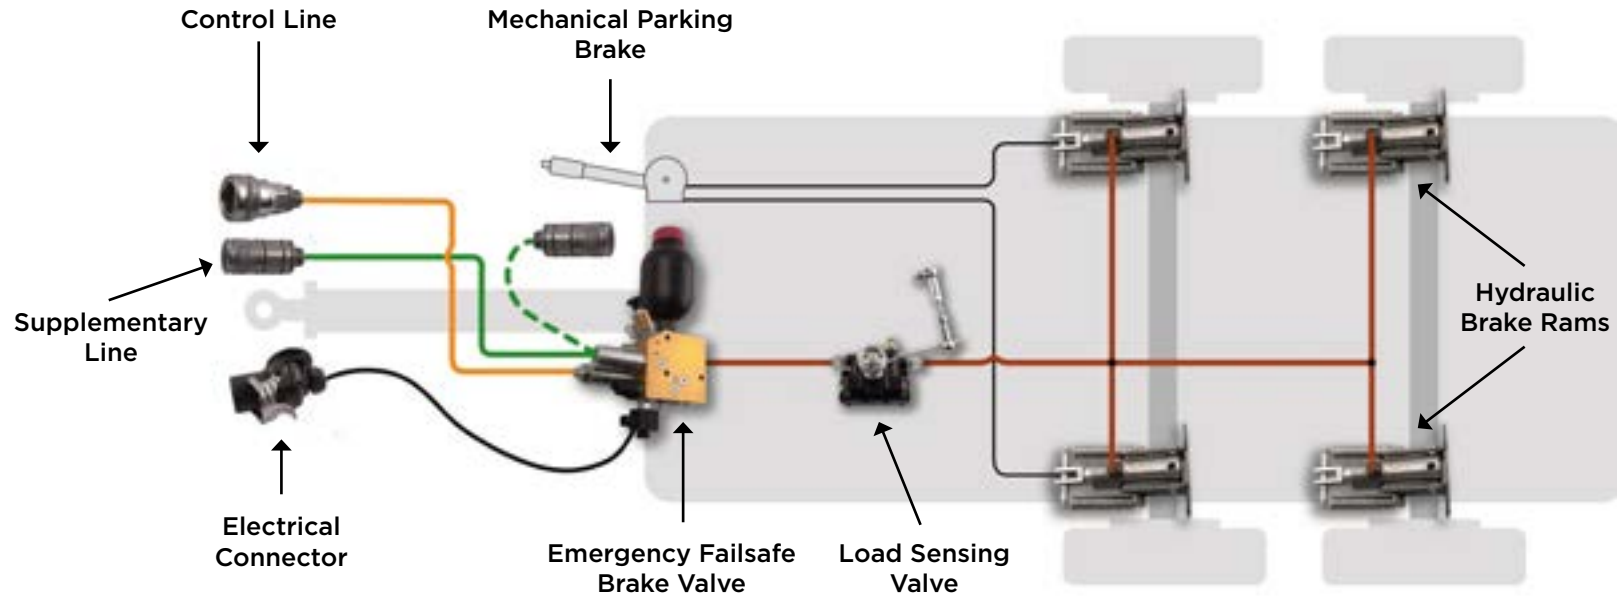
Dual-line hydraulic trailer braking system – Schematic layout (Paul Forrer)
